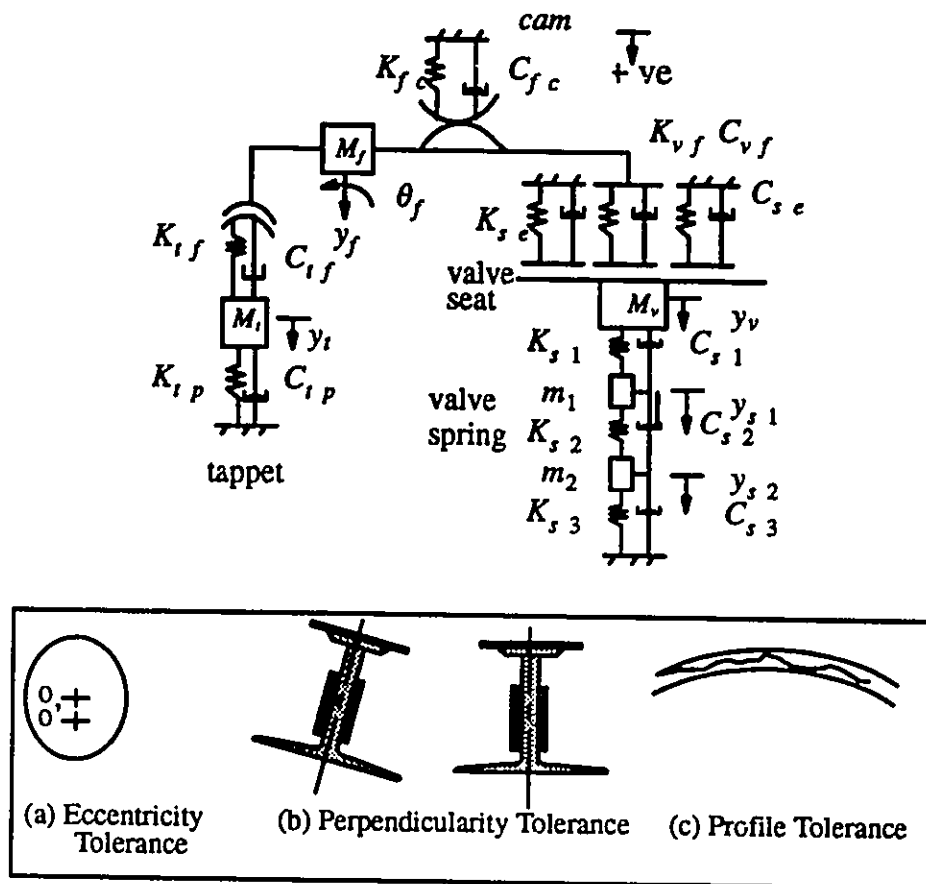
A finger follower type cam valve system [36], dynamic model and geometric tolerances
